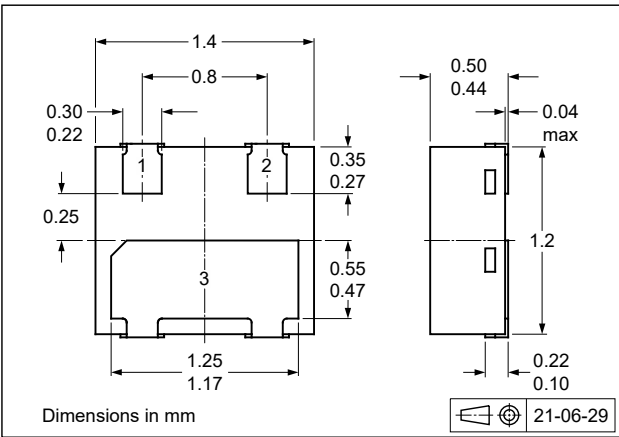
Package outline DFN1412D-3 (SOT8009)
